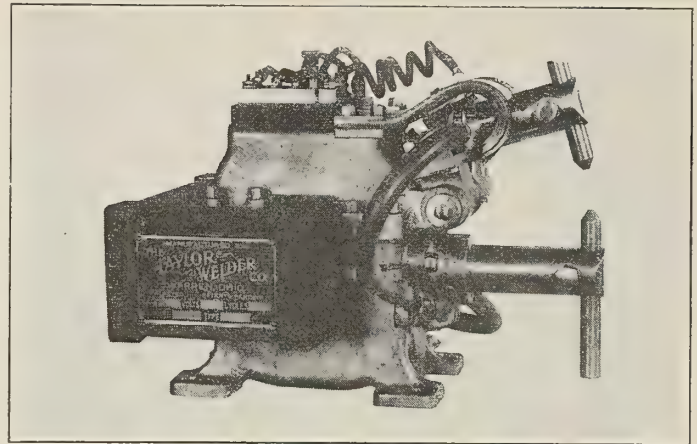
Automatic Electric Rivet Heater for Use When Making Long Runs on One Size of Rivet
